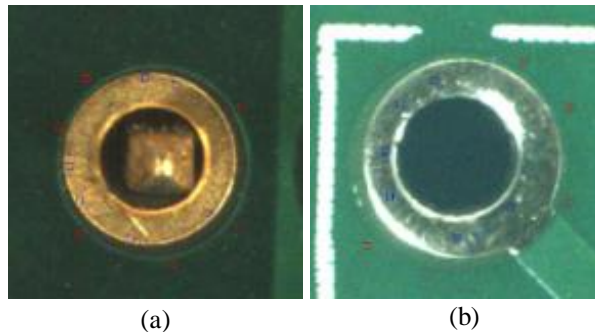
Selected foreground and background regions of a given solder pad. (a). Gold plated solder pad on green PCB surface. (b). Tin plated solder pad on green PCB surface
